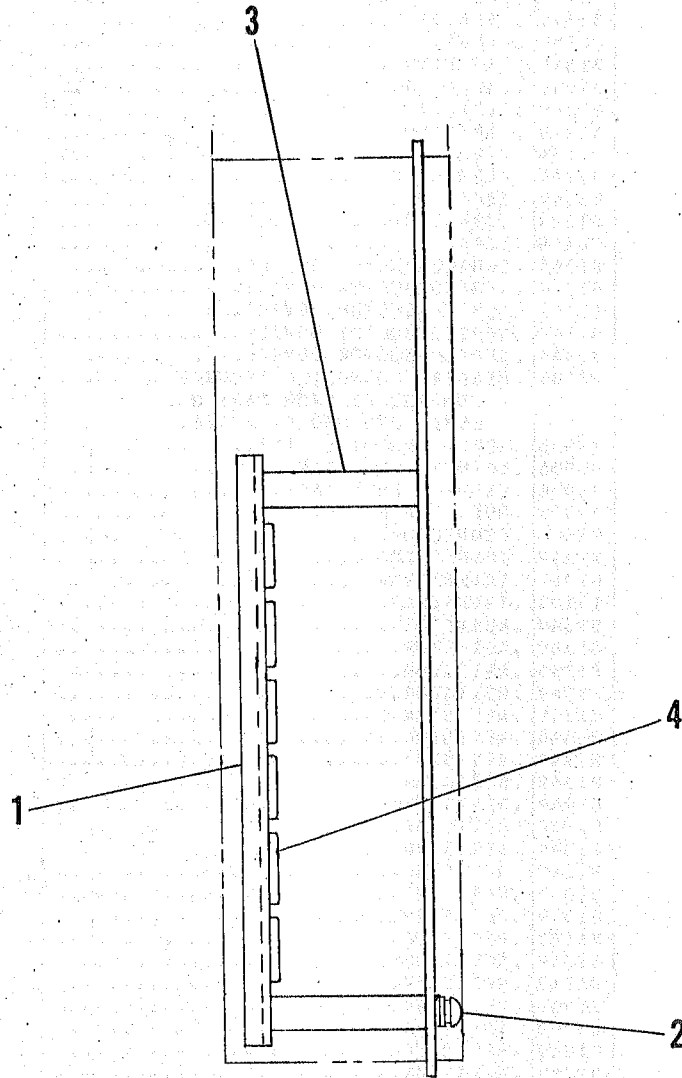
Circuit Card Assembly, Front Panel Interface (Sheet 4 of 4)
